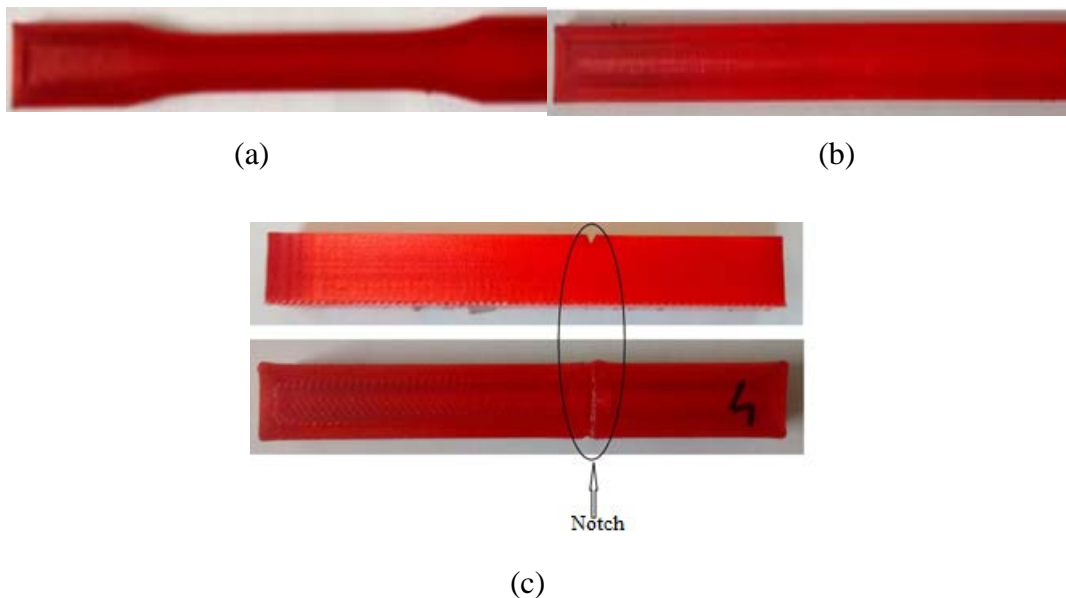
Fabricated specimens of (a) Tensile test (b) Flexural test (c) Impact test
